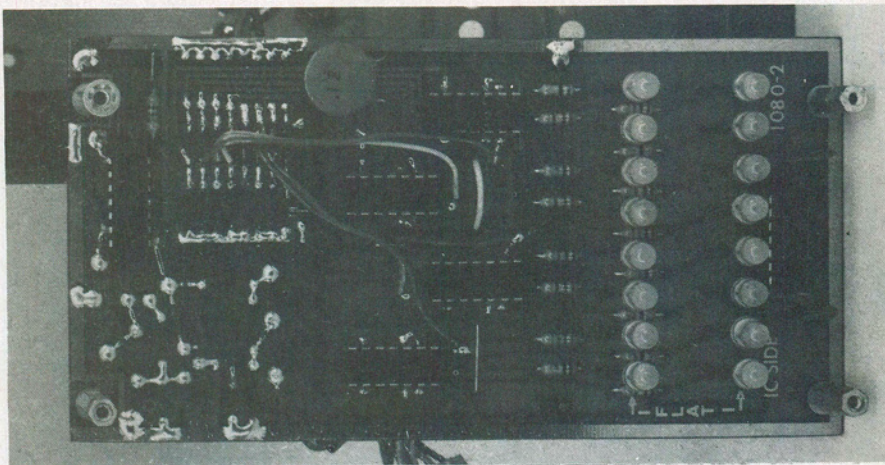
"COMPONENT-SIDE" of display board. Mounting of LED's will be described in next part of article—don't install them without reading it.
